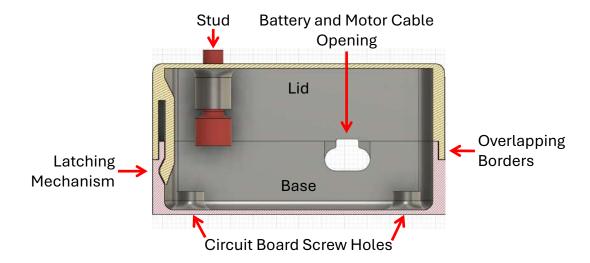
Cross-section of the box housing the binding circuit board created with Autodesk Fusion 360. The box consists of a base and a removable lid. The stud, battery and motor cable opening, overlapping borders, circuit board screw holes and latching mechanism are highlighted.
